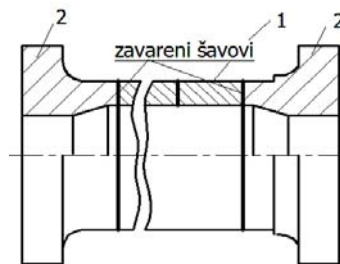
A complex part consisting of two forgings and one casting, joined by welding
